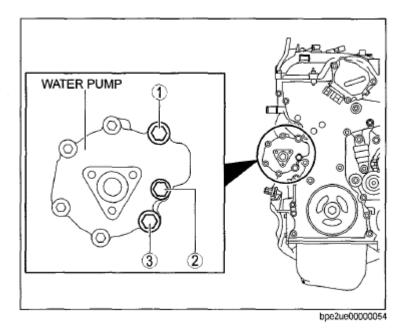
Identifying Water Pump Mounting Bolt Tightening Sequence
